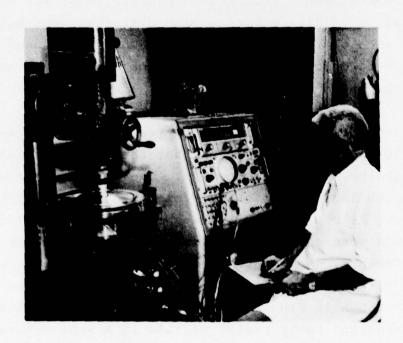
Measuring Rotating Group Clearances with Custom-Fabricated Distance Probes.
